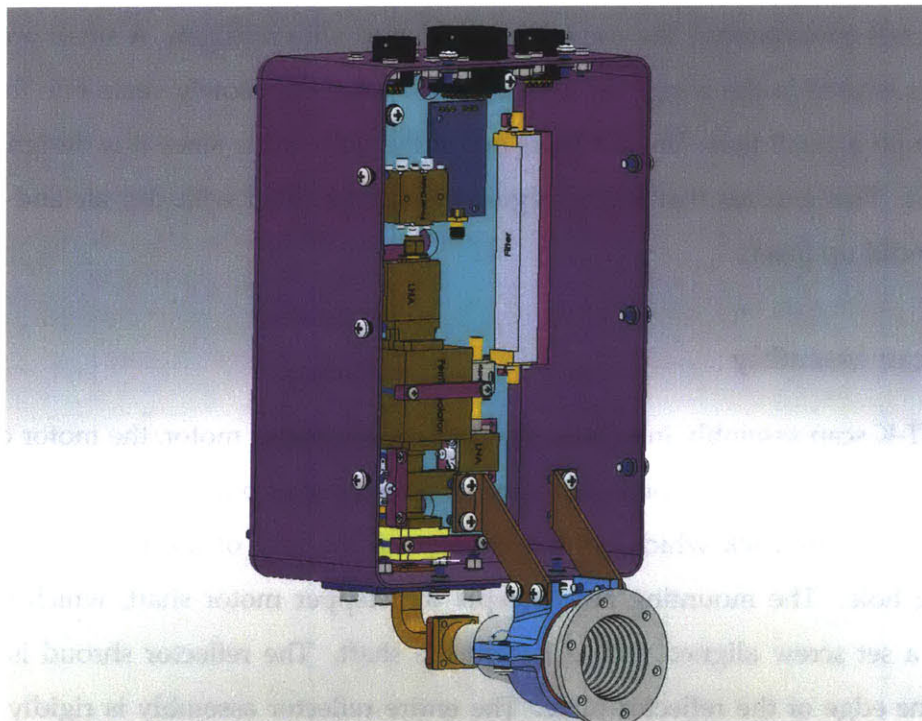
Radiometer front-end enclosure and feed horn. [6]
